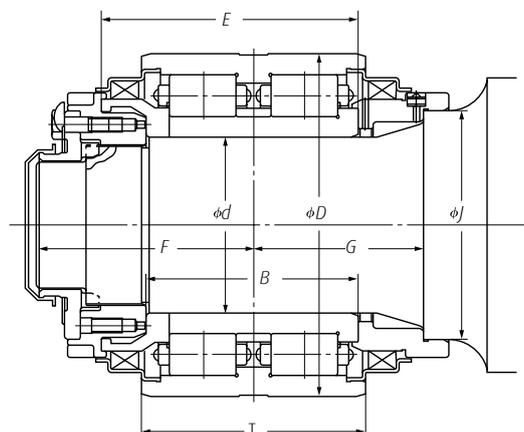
Sealed-Clean Rotating End Cap Cylindrical Roller Bearings
